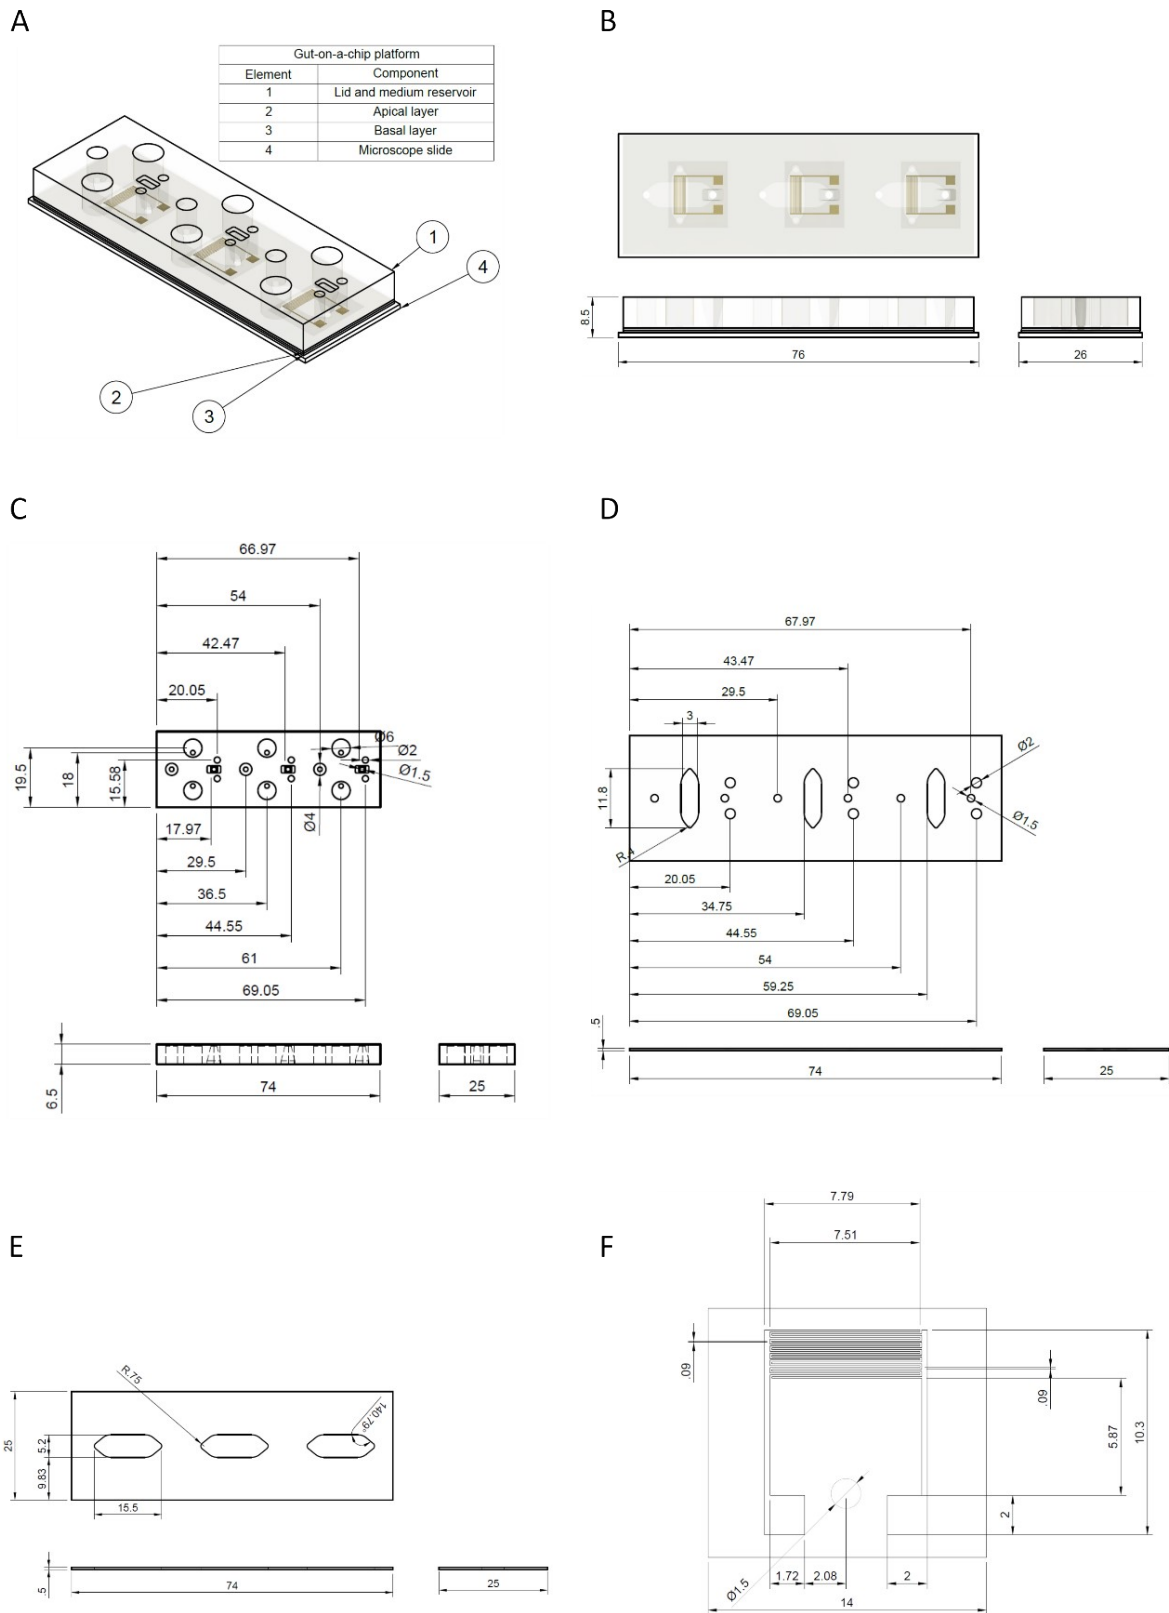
1: (A) Render of the gut-on-the chip platform. (B) Technical drawing of the entire microfluidic system. (C) Technical drawing of the cast PDMS lid with medium reservoirs. (D) Technical drawing of the apical layer. (E) Technical drawing of basal layer and (F) technical drawing of the electrode. All dimensions are in millimeters (mm).
